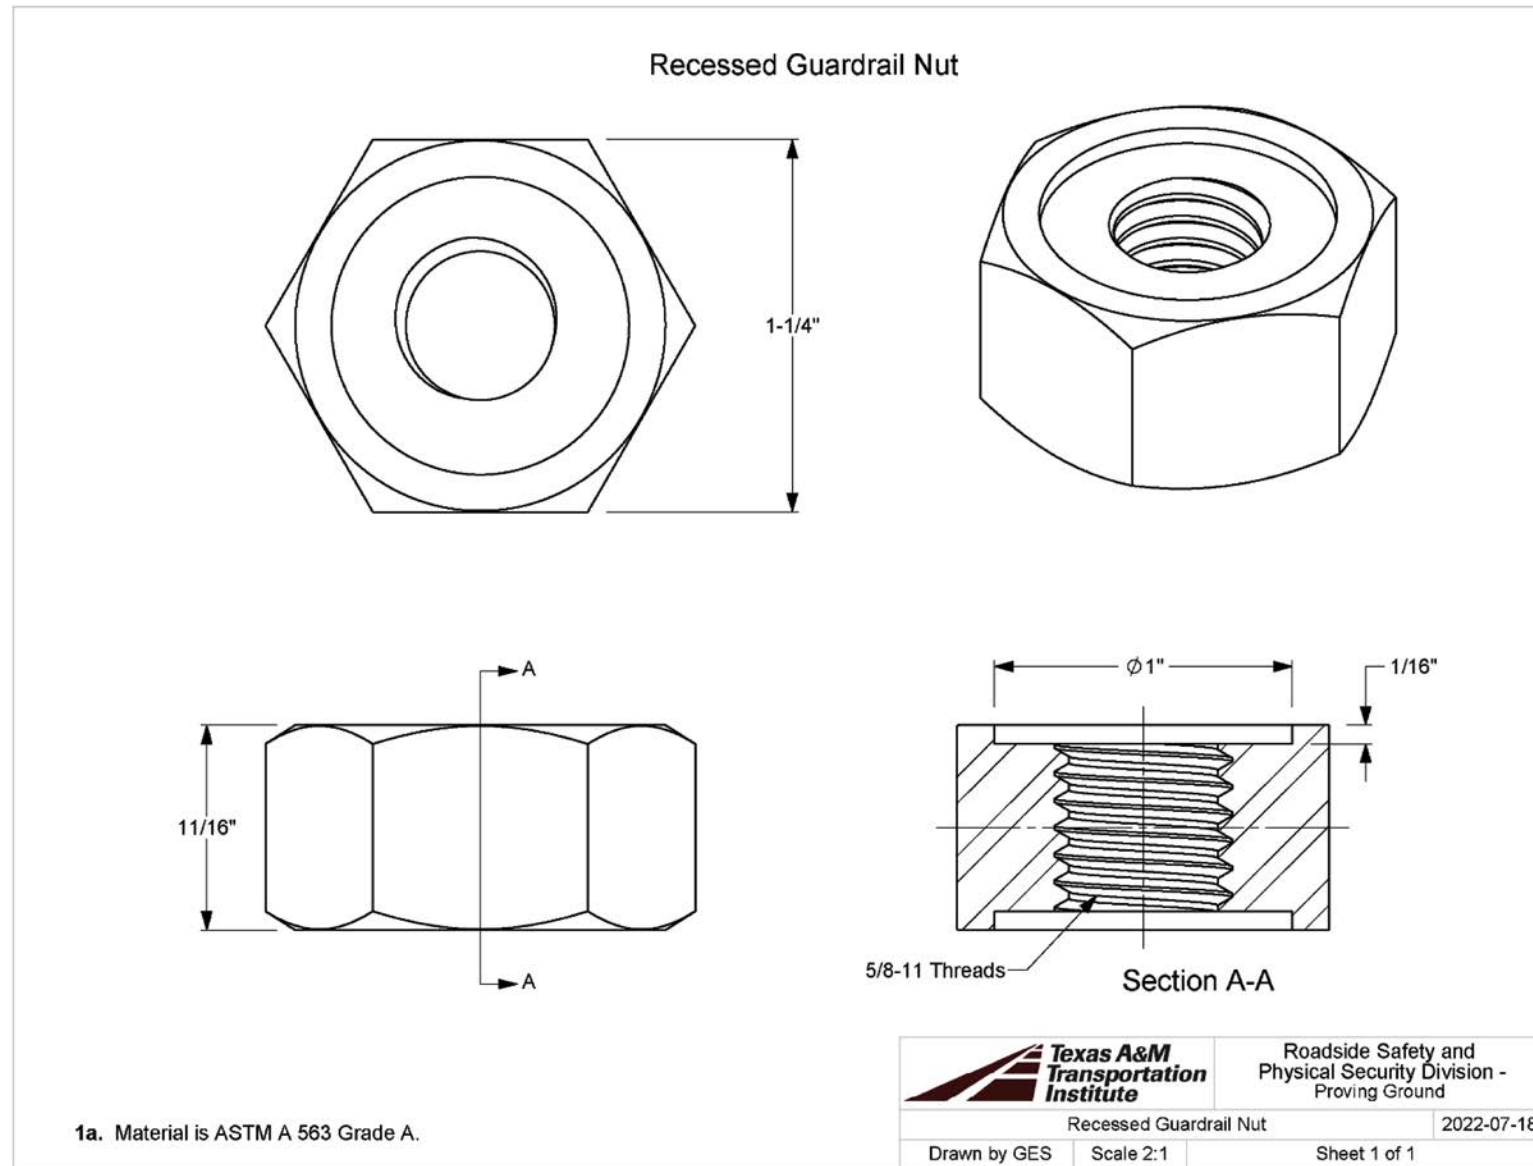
Tests 612941-02-1 and -2 guardrail bolts.
